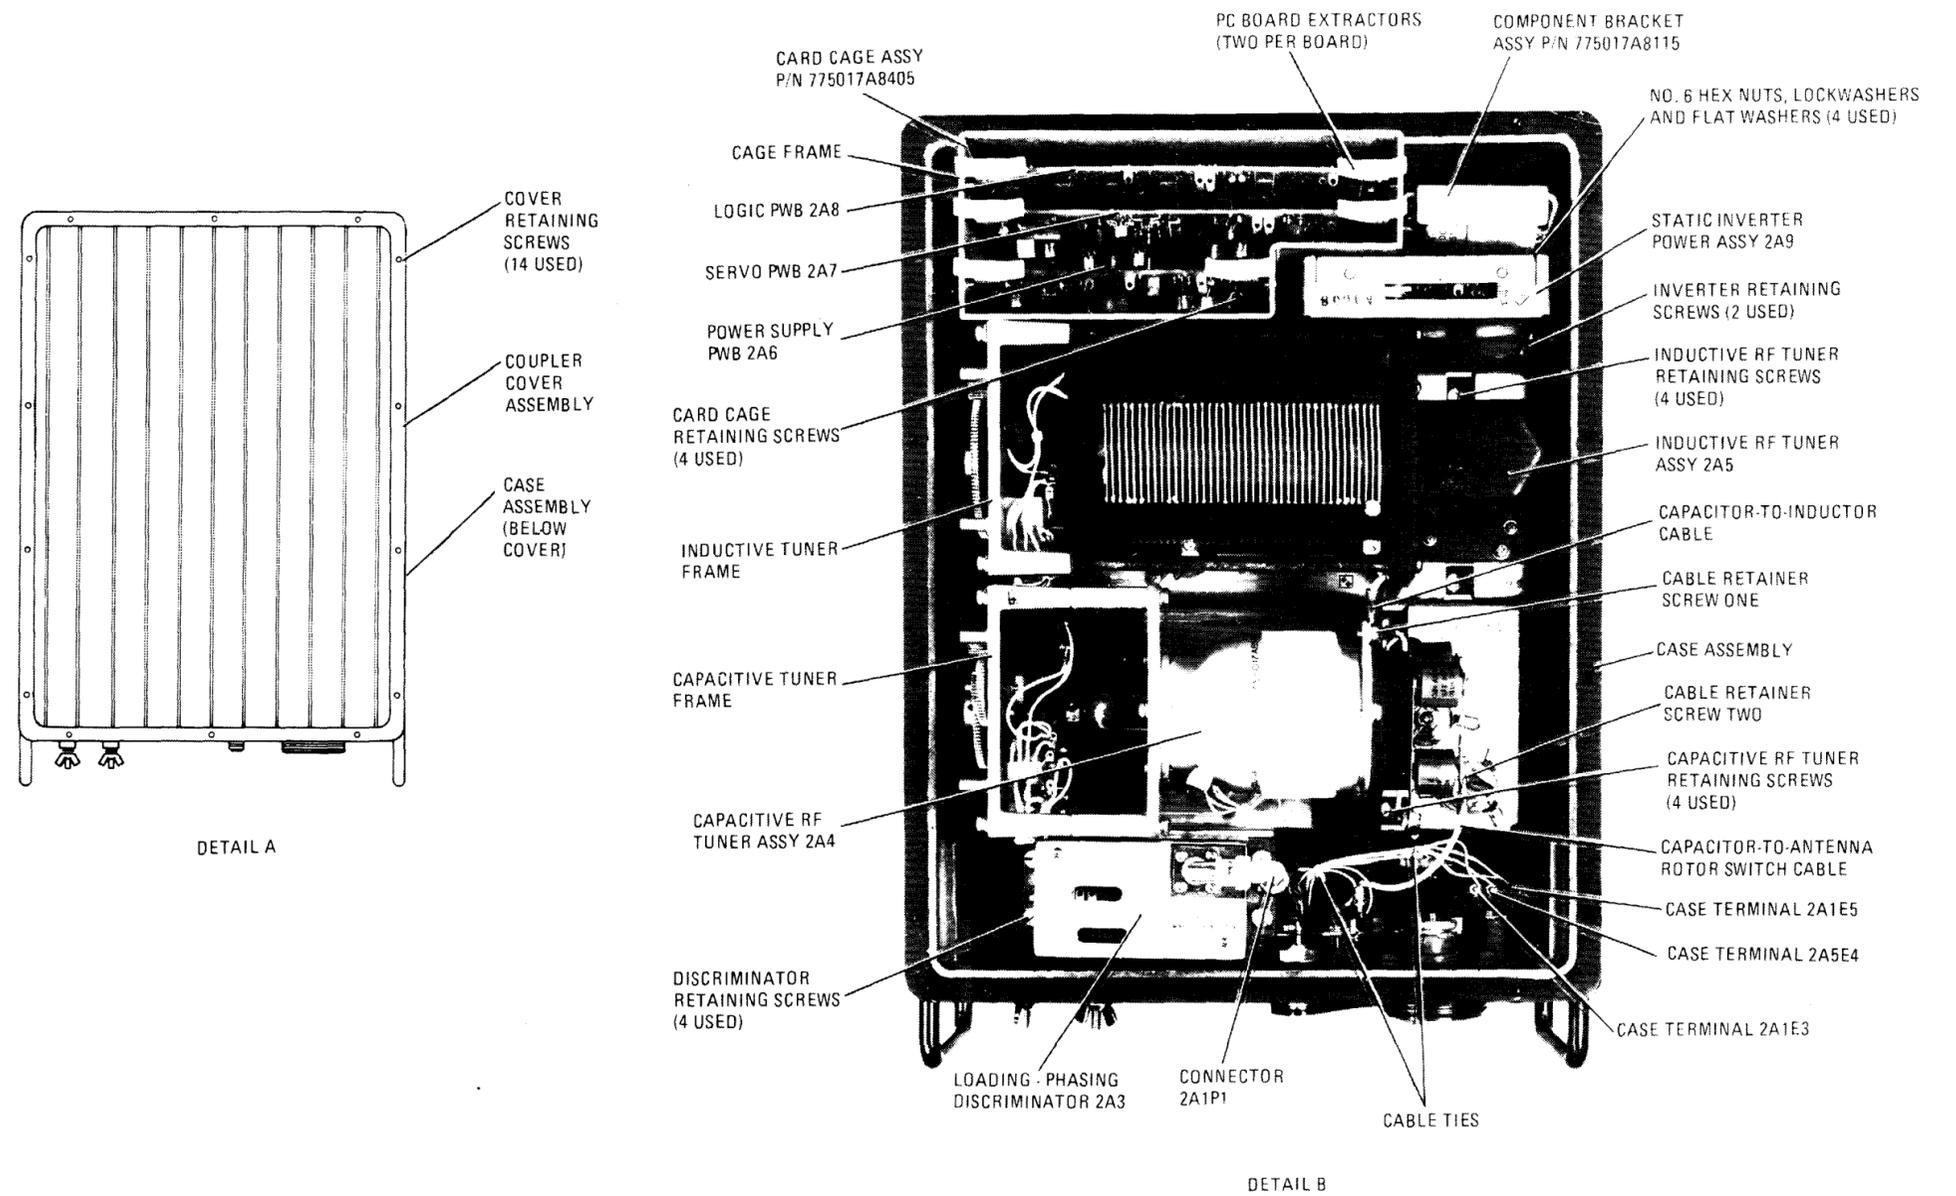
Antenna Coupler CU-2064/GRC-193 Disassembly/Reassembly Details (Sheet 1 of 2)
